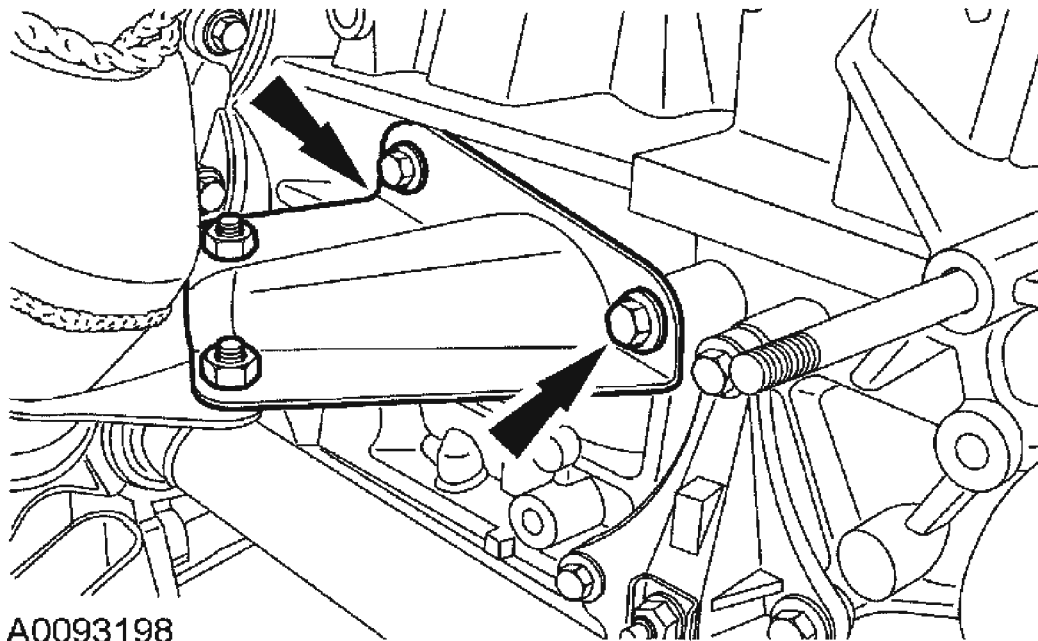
Removing Bolts And Catalytic Converter Support Bracket
